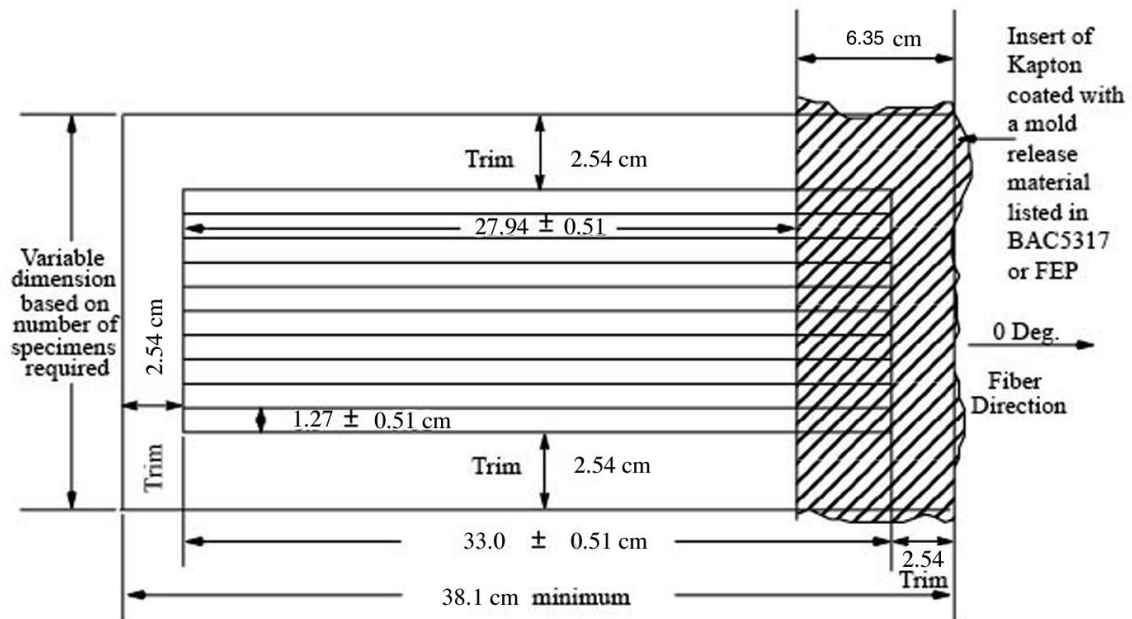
DCB specimen and panel geometry and dimensions, plan view
